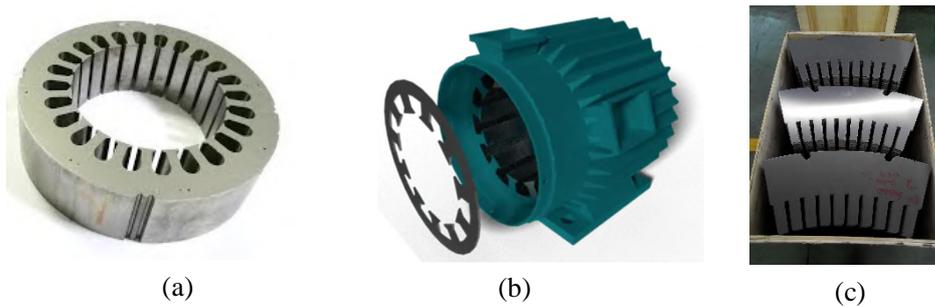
a) Stator core stampings for a low rating machine, b) yoke and Stamping of three phase induction motor, c) Stator core stampings for a higher rating machines
